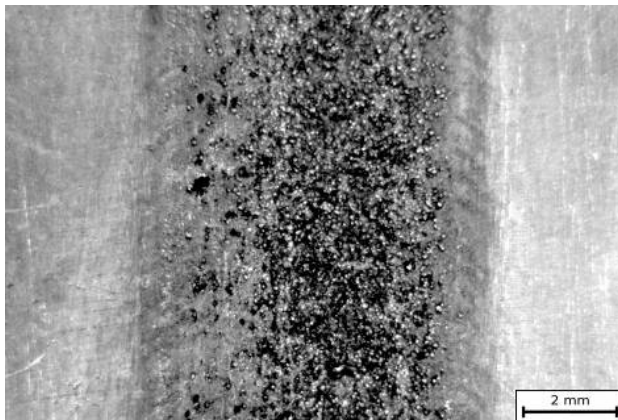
View of the MCMgAl12Zn1 casting magnesium alloy face of weld after laser treatment with Al_2O_3 , scan rate: 0.5 m/min, laser power: 2.0 kW
